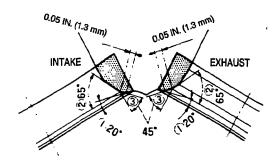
CHECKING VALVE FACE CONTACT
